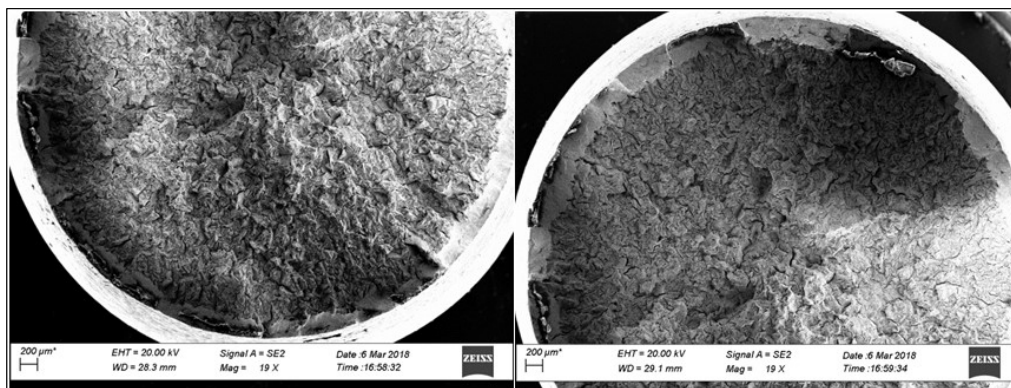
SEM f micrograph showing general view of brittle fracture surface of tensile tested specimen (SP-3)
